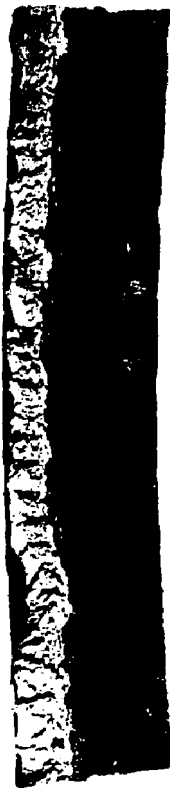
Fracture surface of Heat 63843. Extent of cracking shown by darkened fracture surface.
